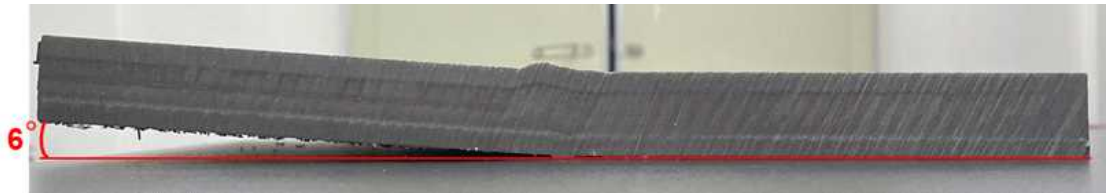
Angular distortion measurement of unconstrained weld
